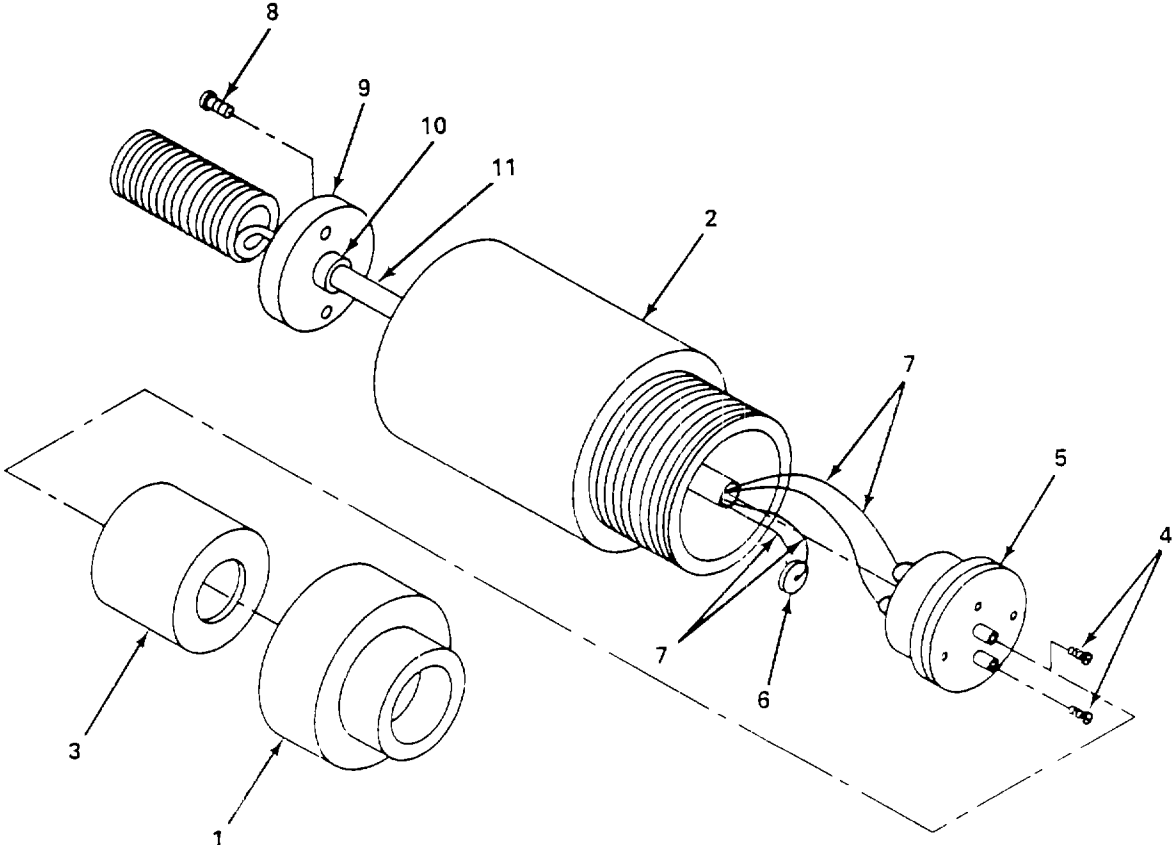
Portable Oxygen Analyzer Probe Assembly, Repair.
